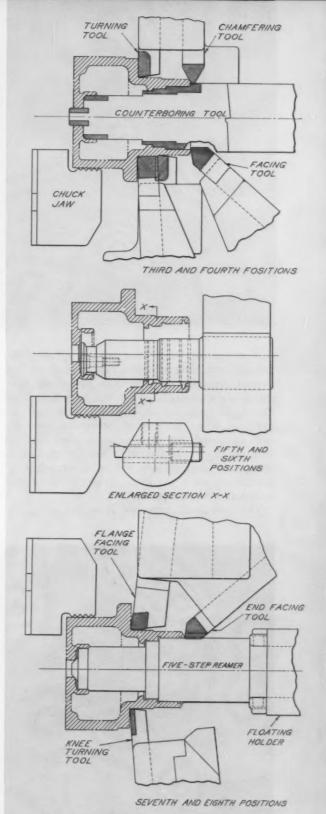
Multiple tooling employed on the automatic chucking machine seen in Fig. 3. Facing tools are hydraulically relieved at the seventh and eighth positions.
